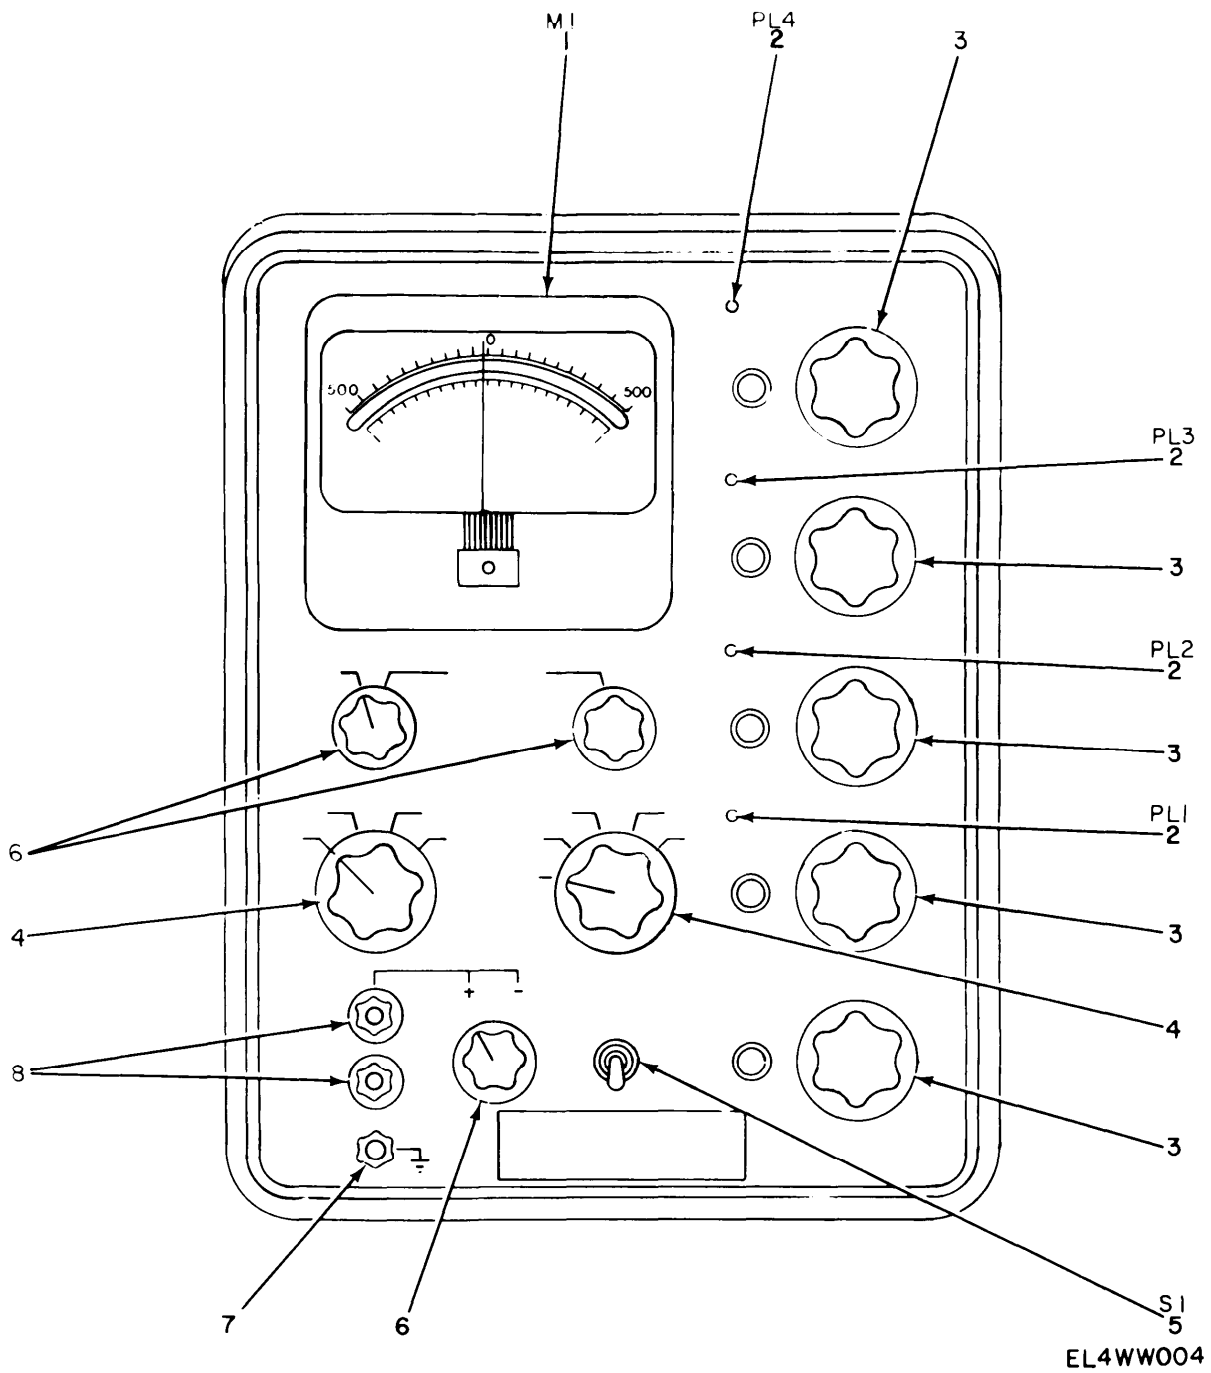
Voltmeter, Electronic, ME-161A/U, Panel Assembly, Front View.
